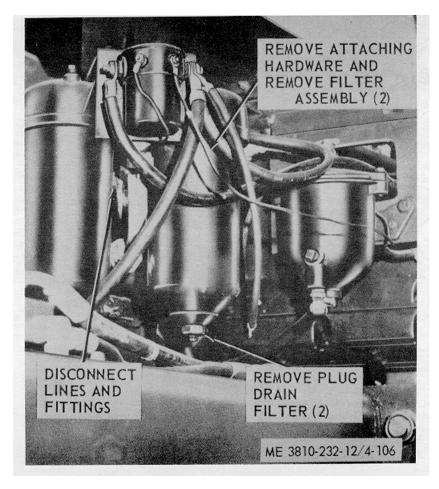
Transmission and torque converter oil filter, removal and installation.
